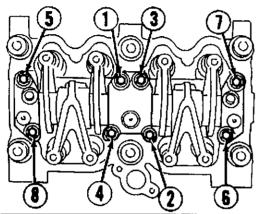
Rocker Bolt Tightening Sequence Courtesy of Subaru of America, Inc.
